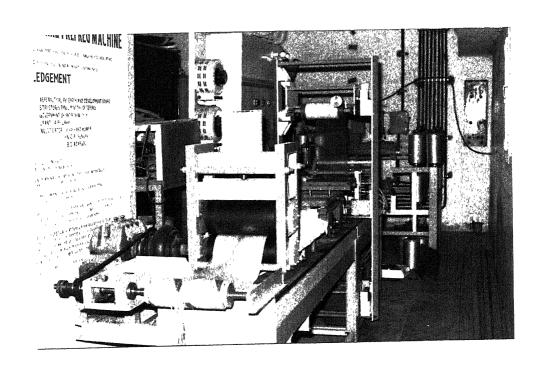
(a) MODIFIED LAYOUT OF PREPREG MACHINE AT ESA LAB MECHANICAL ENGG. DEPARTMENT, IIT KANPUR.
